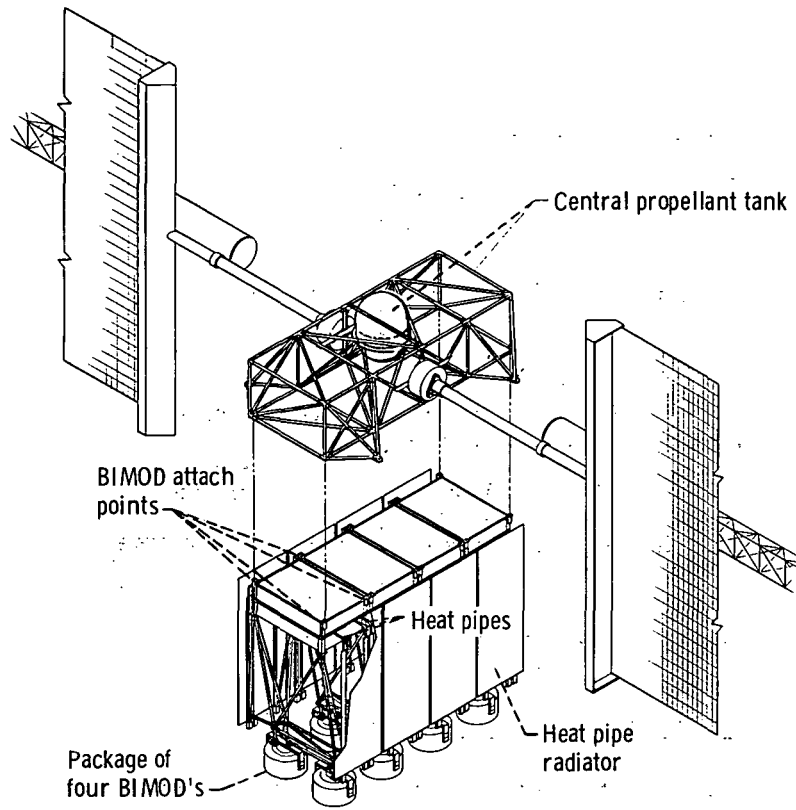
Top view of exploded power processing unit - TSSM assembly.
